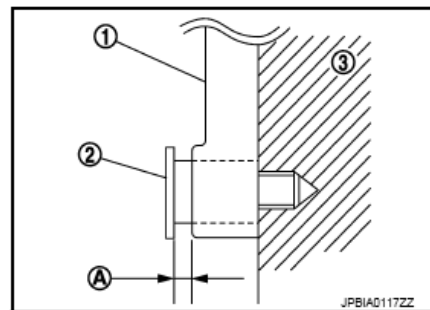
Identifying Slack Guide, Cylinder Block And Mounting Bolts
